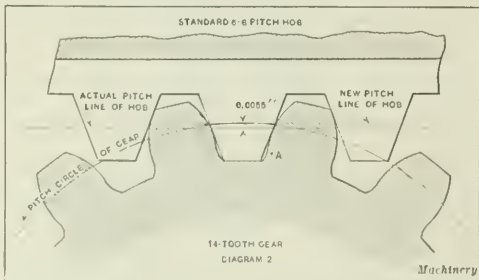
Cutting Fourteen-tooth Gear Deeper than Standard to give Backlash between the Gears
